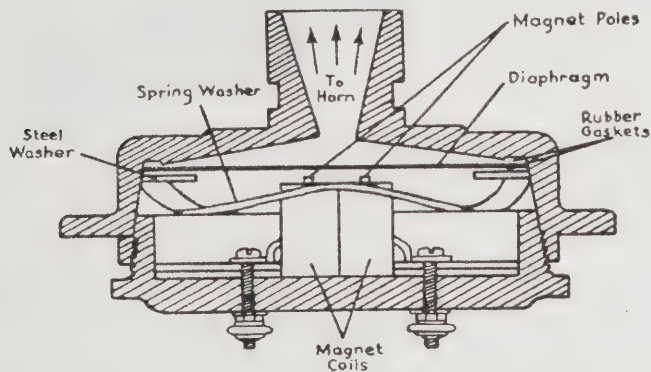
CROSS SECTION VIEW OF SOUND UNIT (HORN TYPE).
